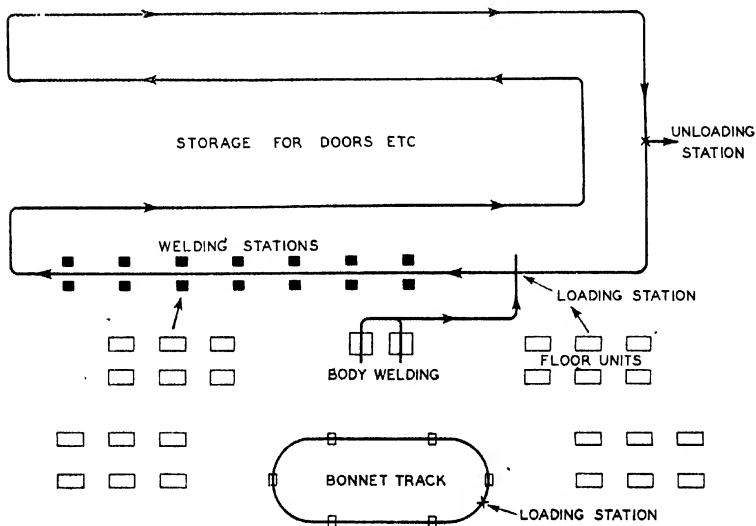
LAYOUT OF THE BODY SHELL ASSEMBLY DEPARTMENT OF A LARGE MODERN FIRM
